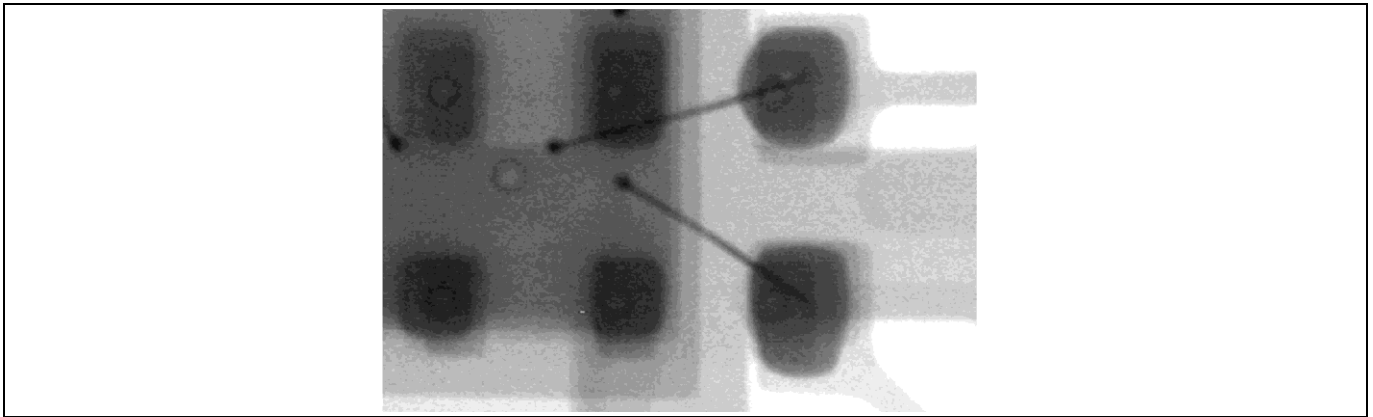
Typical X-ray image of a soldered TSLP package. The solder joints, bond wires, and parts of the package internal setup are visible.
